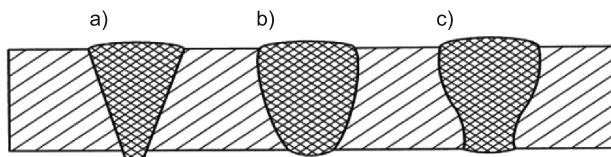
Weld shapes after laser welding: a) triangular, b) and c) mushroom-shaped
